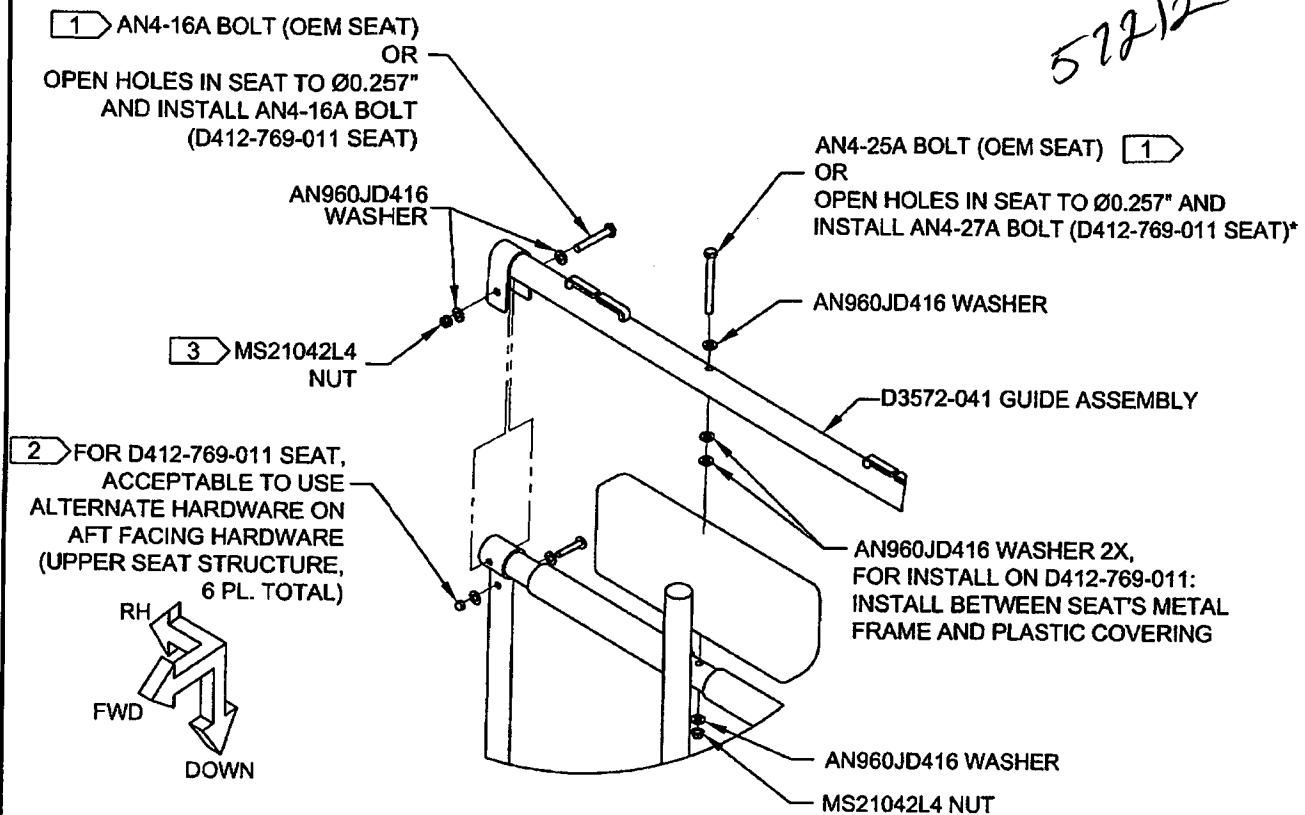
SHOULDER BELT INSTALLATION
